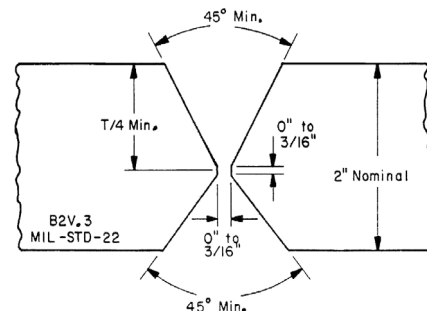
Typical joining configuration for explosion bulge test weldments
